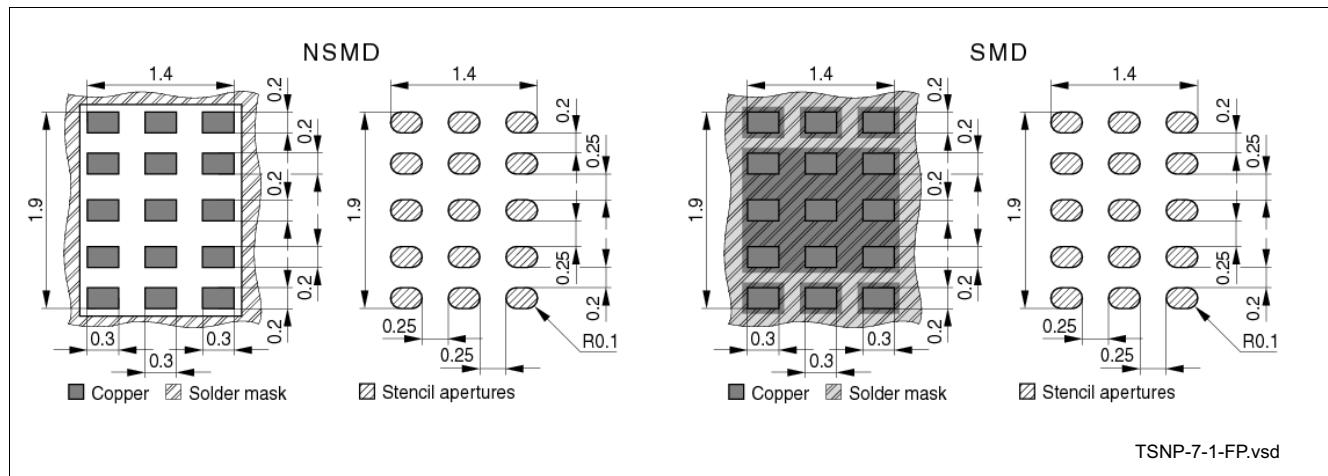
Recommended Footprint and Stencil Layout for the TSNP-7-1 Package
